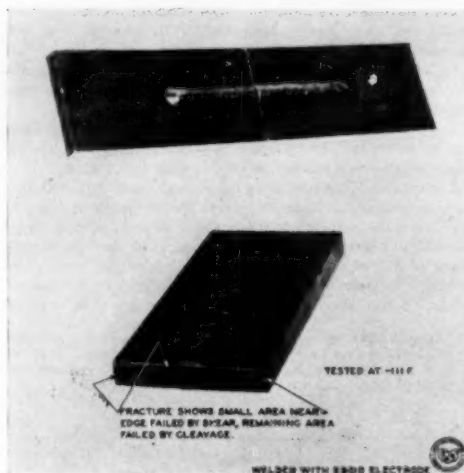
TYPICAL WELDED KINSEL-TYPE NOTCH-BEND SPECIMEN OF 1/2-IN. QUENCHED-AND-TEMPERED T-1 STEEL BEFORE AND AFTER TESTING
